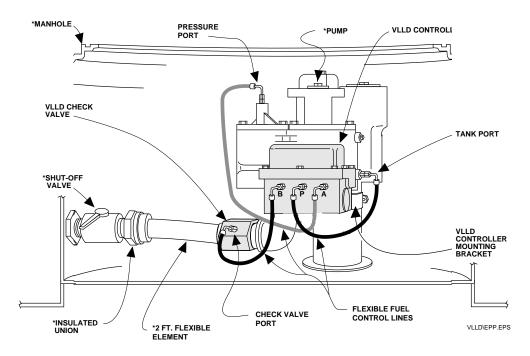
Typical FE Petro VLLD Installation (side view, horizontal check valve mount)
